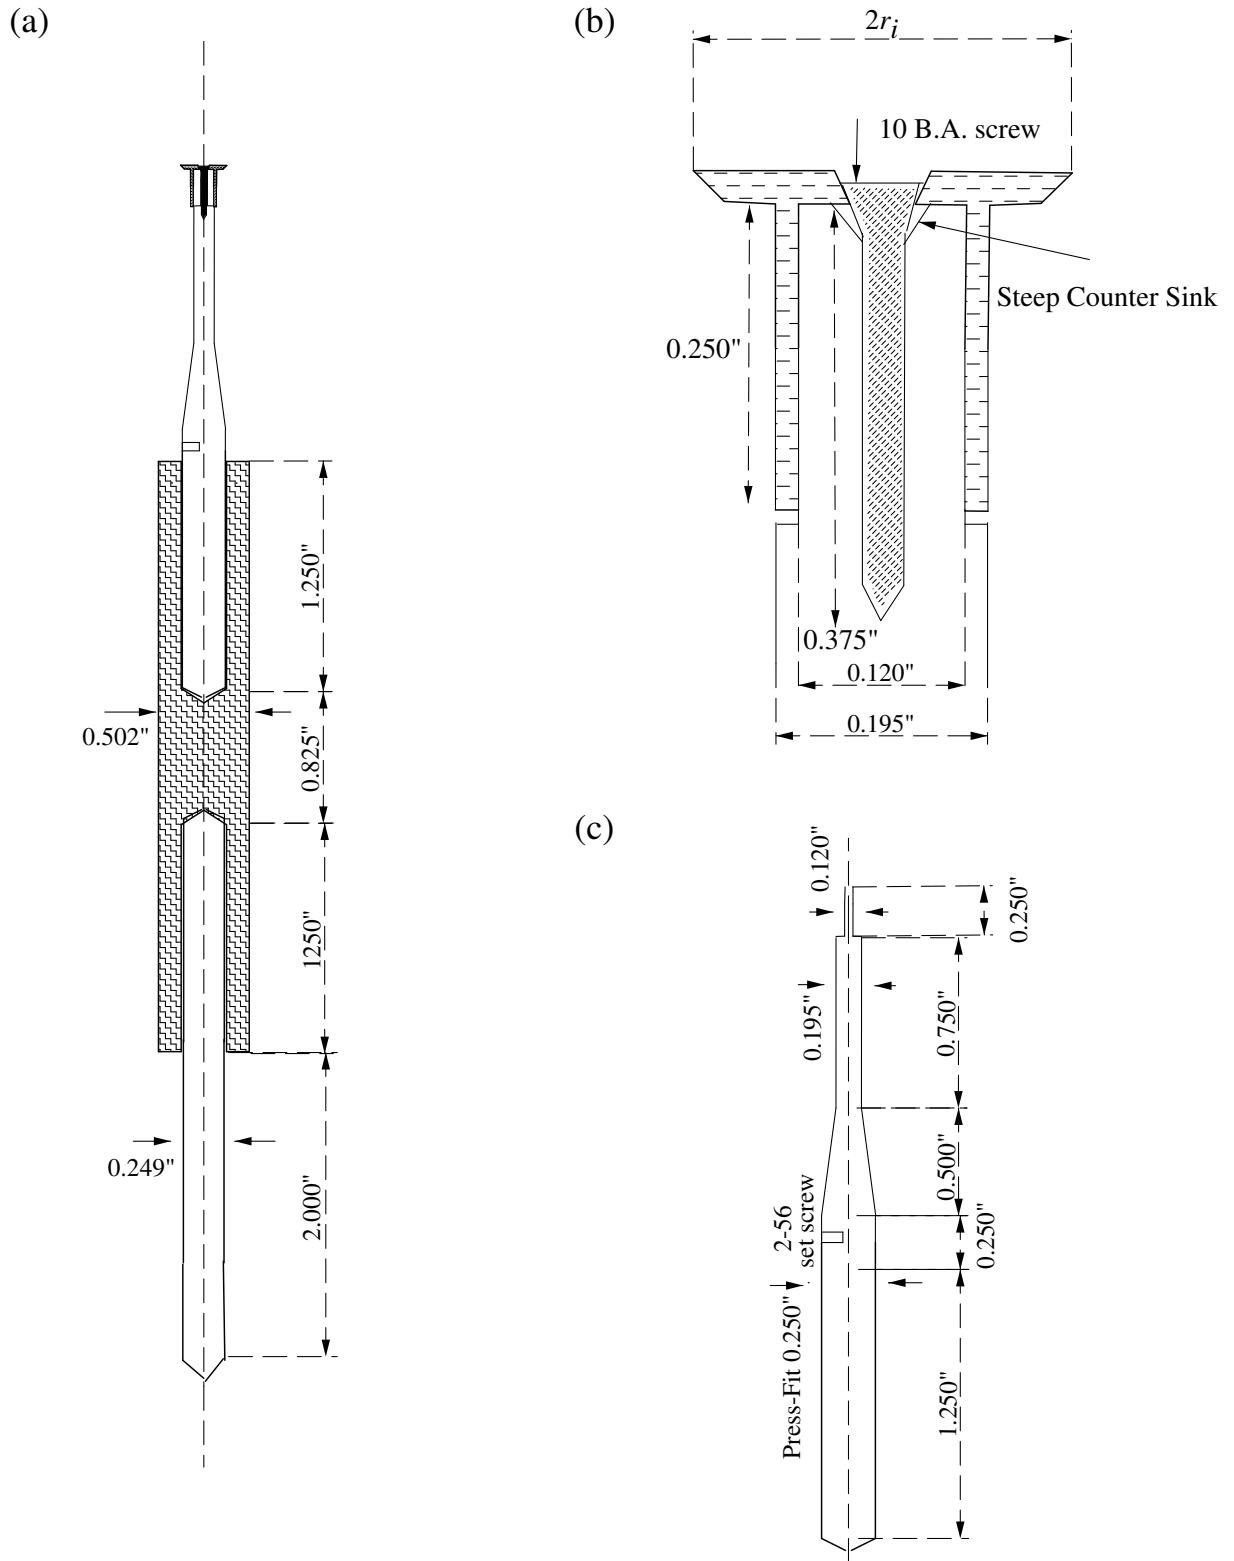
A schematic of the inner electrode. An assembled inner electrode (a) consists of the electrode (b), a shaft (c) an insulating sleeve and a smooth rod.
